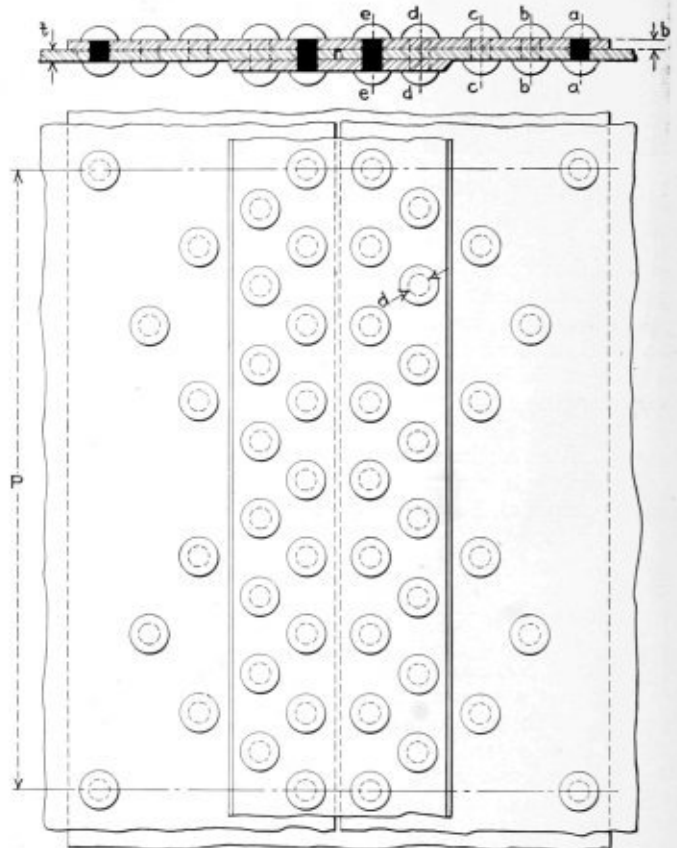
Quintuple Riveted Double Butt Strap Joint
